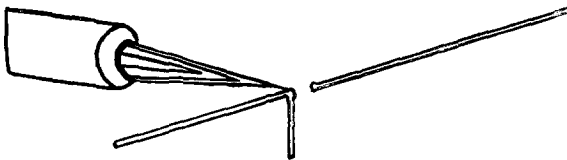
Shows method of soldering a break near one of the pins. Let the pin hang downward and the solder will hold it in place while the union is being made with the other piece.
